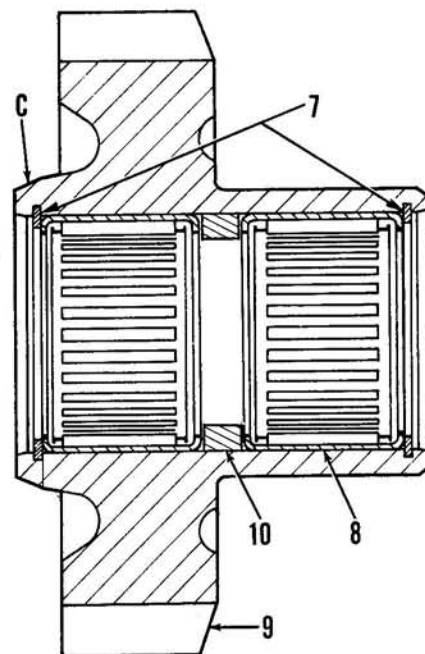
Cross-sectional view of latest type PTO idler gear and bearing assembly. Refer to Fig. 170 for exploded view. When installing gear in earlier models, it may be necessary to remove some material from gear hub at (C) for clearance. Refer to Fig. 170 for legend.
